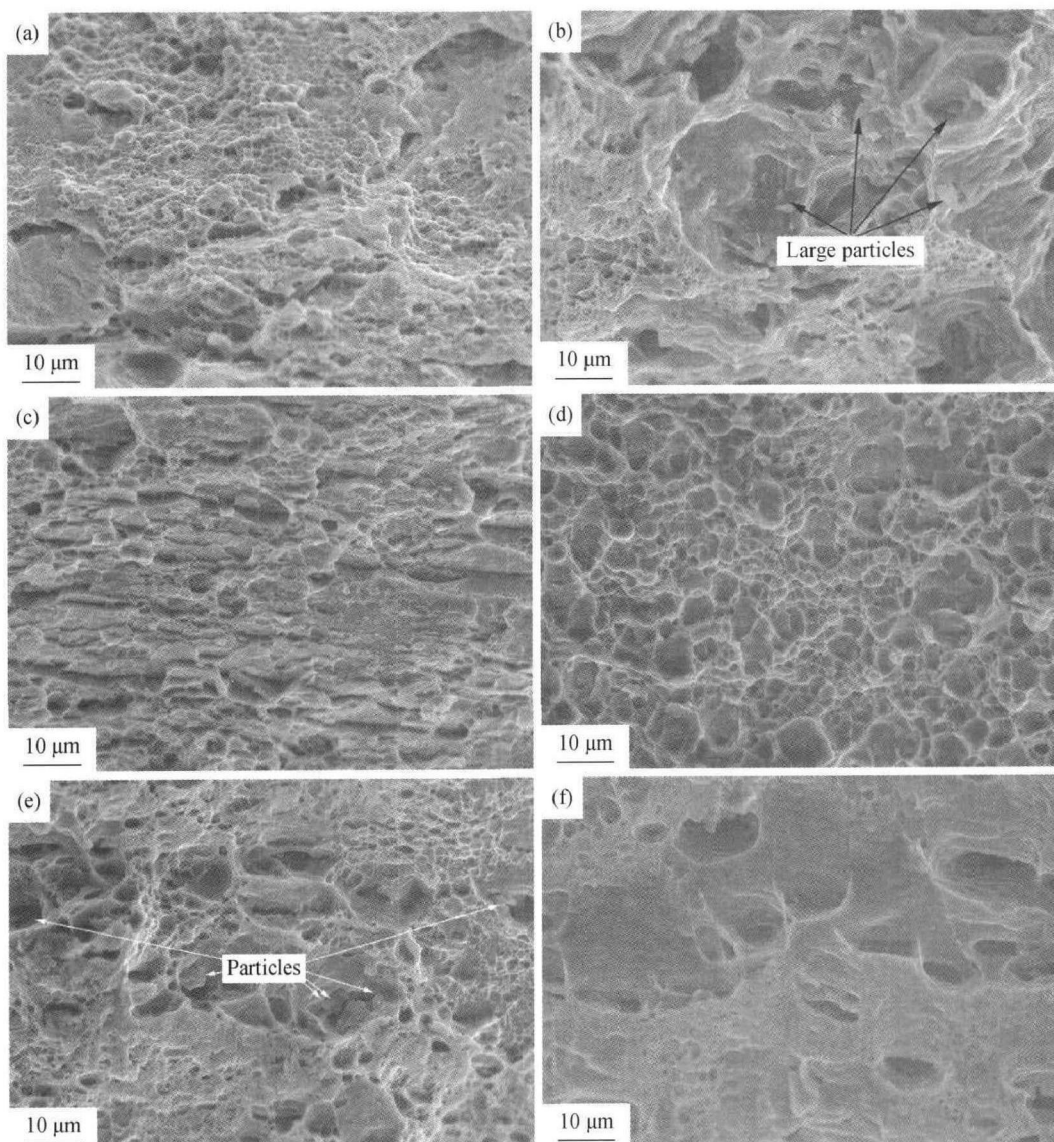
Fracture surfaces after tensile test: (a) WQ, (b) FC, (c) 180°C rolling WQ, (d) 560°C rolling WQ, (e) R-rolling FC, and (f) 560°C rolling FC alloys.
